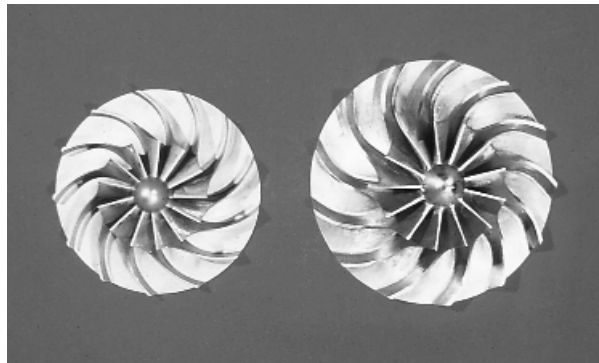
Cast three-dimensional open impeller. (*Dresser-Rand Company, Olean, N.Y.*)
